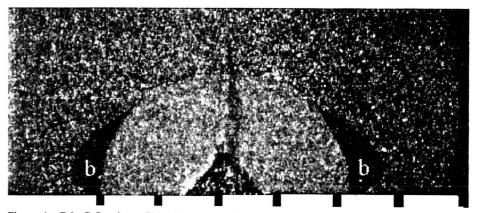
D6-aC Specimen #10 - Fracture surface showing stable growth near surface at "b." (mm scale bars)
